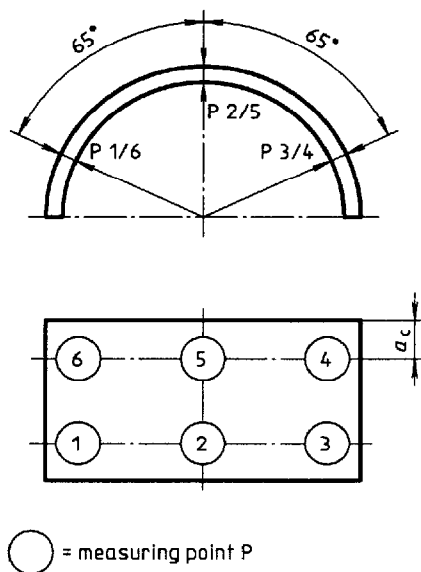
Six-point measuring scheme for half-bearings with $B \leq 50$ mm and $D_o \leq 80$ mm
